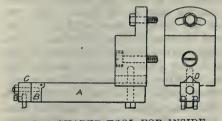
SHAPER TOOL FOR INSIDE WORK.
